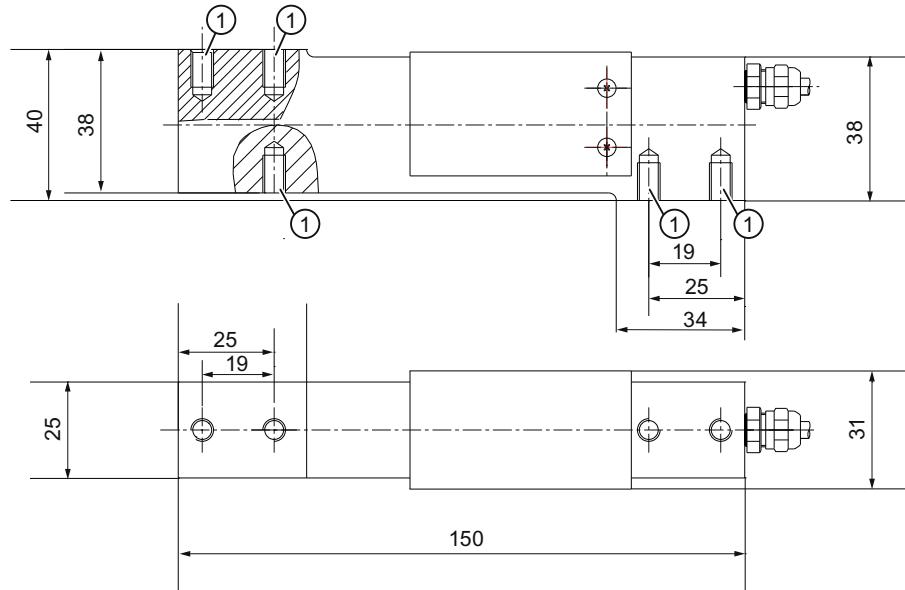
SIWAREX WL260 SP-S SA dimension drawing
